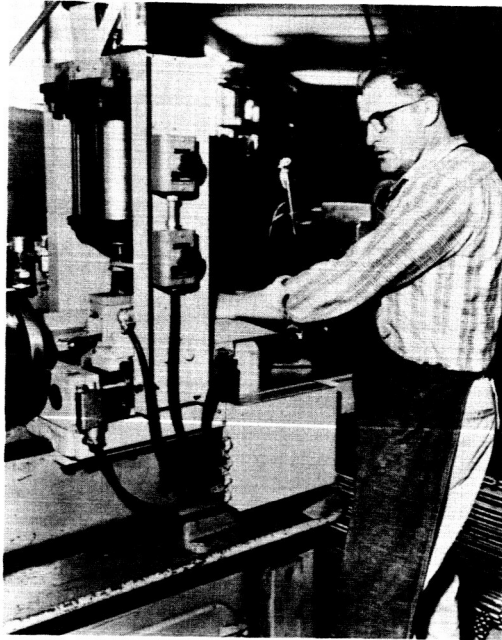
SPINNING OF INCONEL 600 USING A ROTATING TOOL AND A STATIONARY PART
